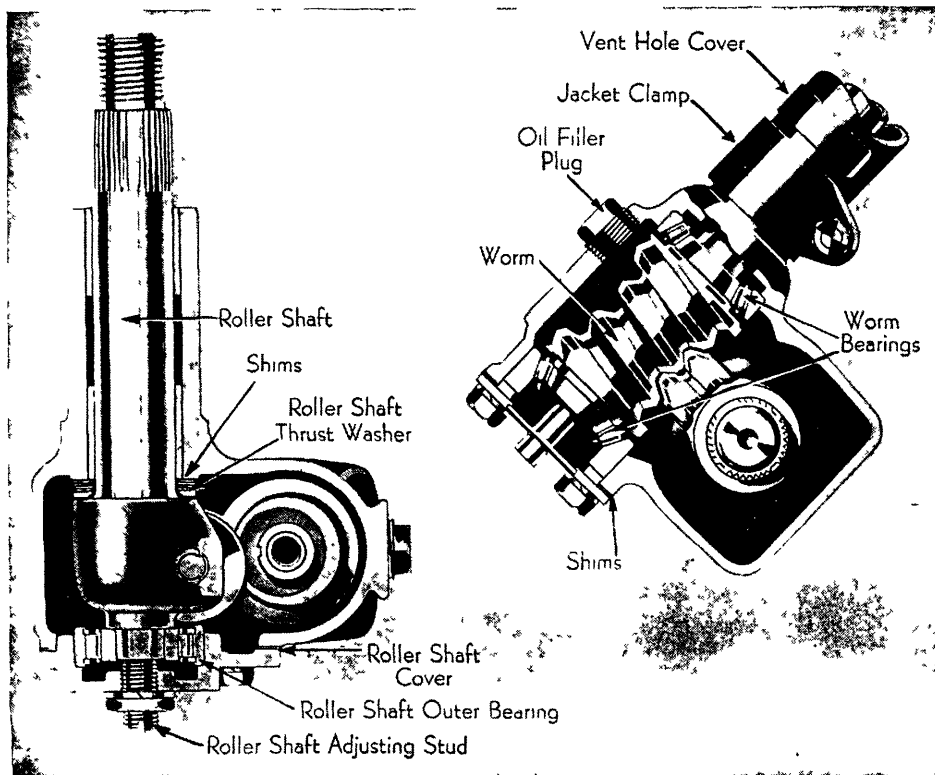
Gemmer worm and roller with internal mesh adjustment and straddle-mounted shaft
